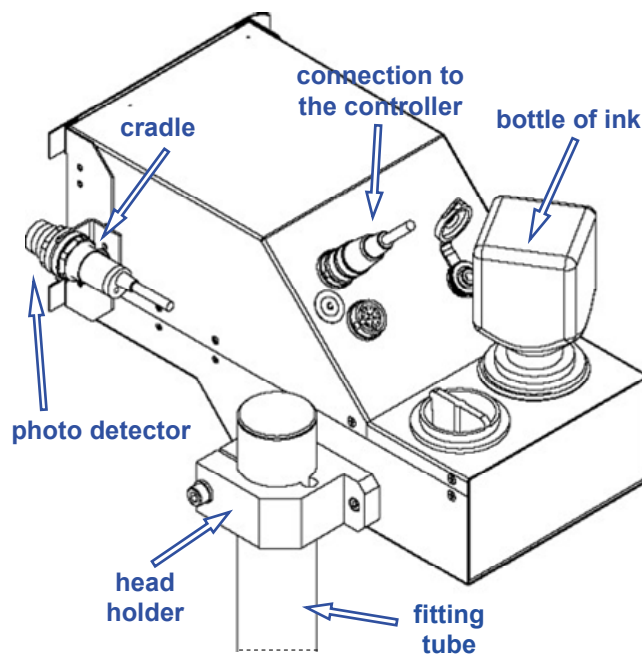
Fixing a standard piezoceramic head holder to the conveyor
